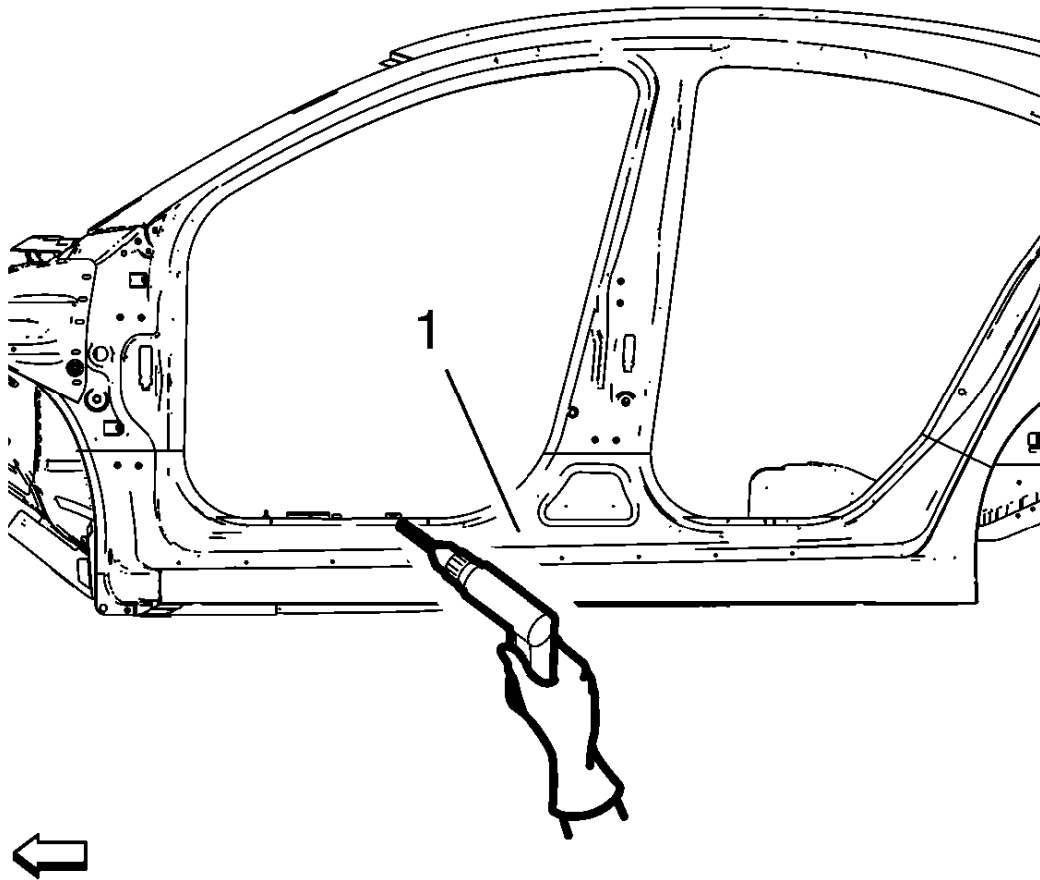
Drilling Factory Welds Of Rocker Outer Panel
